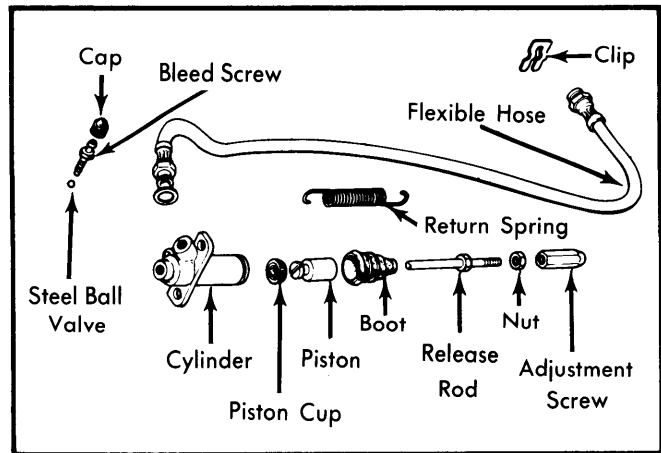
Exploded View of Clutch Master Cylinder.
